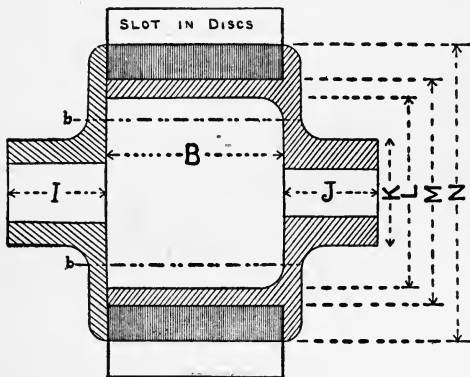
SECTION THROUGH ARMATURE CORE.
